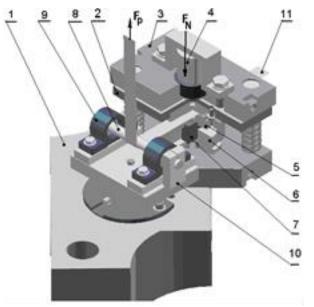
Model of friction simulator – strip drawing test 1-base plate, 2-middle plate, 3-upper plate, 4-hydraulic clamping cylinder, 5-upper grip, 6-lower grip, 7- dynamometer for measurement of blankholding force, 8-roller, 9-ball bearings, 10- brake mechanism of the roller, 11-strip
